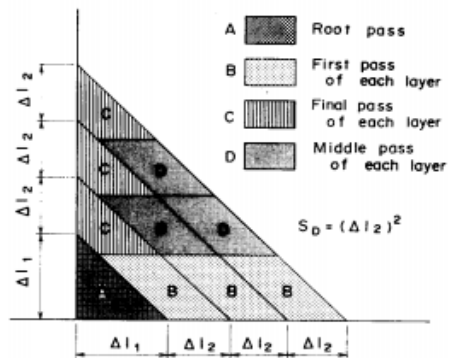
Build-up method and welding sequence for horizontal fillet welding, Moriyasu et al. (1993)
